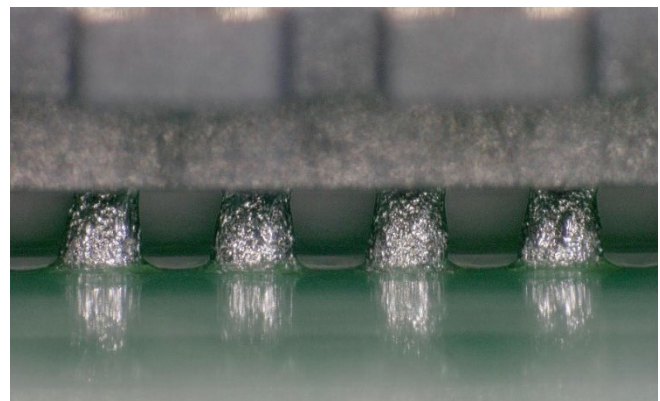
Solder Joint Formation – without Collapsible Solder Balls (Soldered with Bismuth-Based Low Temp Solder Paste)
